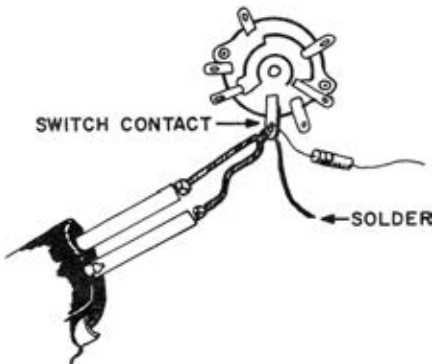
Positioning a switch lug downward while soldering so that solder won't flow into the switch contact.
